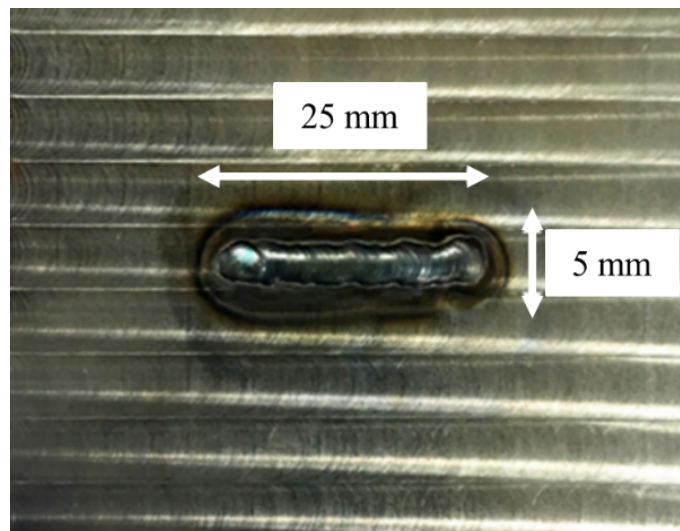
Weld seam on the mild steel coupon.
